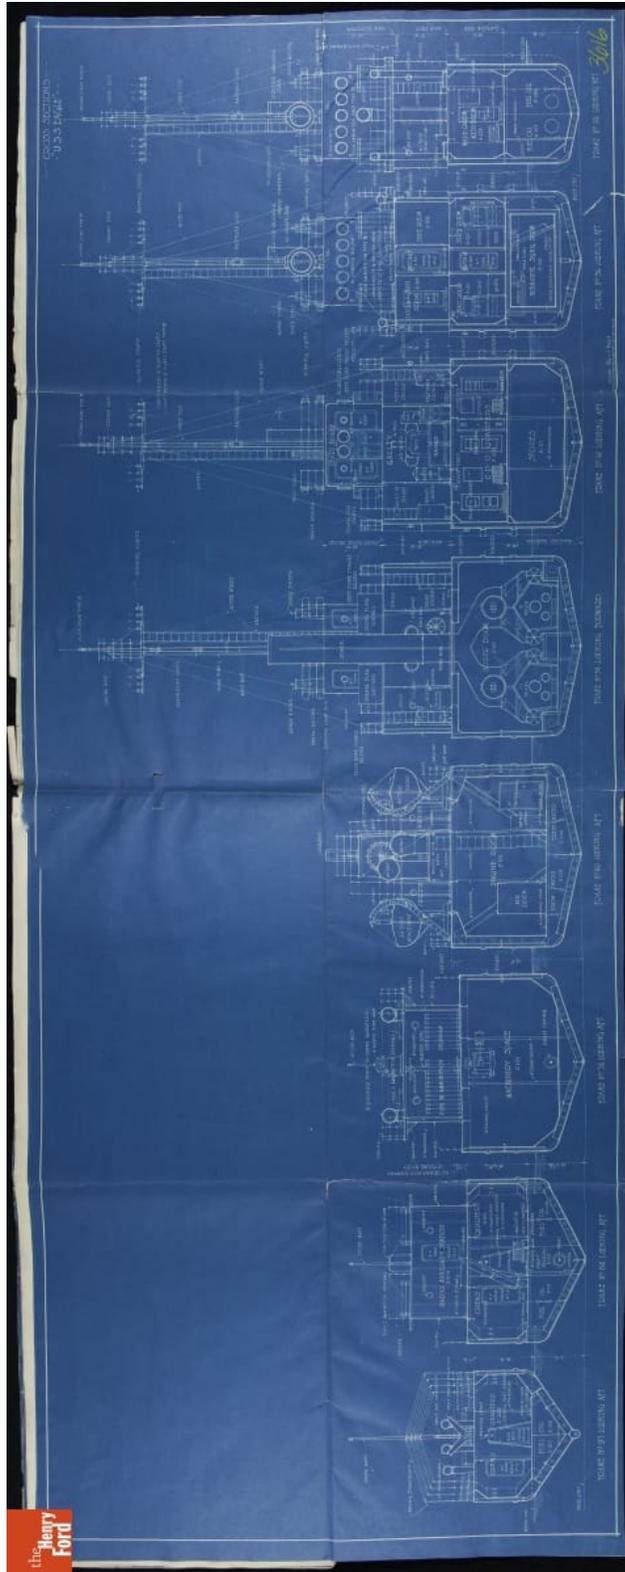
Ford Motor Company “Eagle Boat” Blueprints (Ford Motor Company 1918:8)
